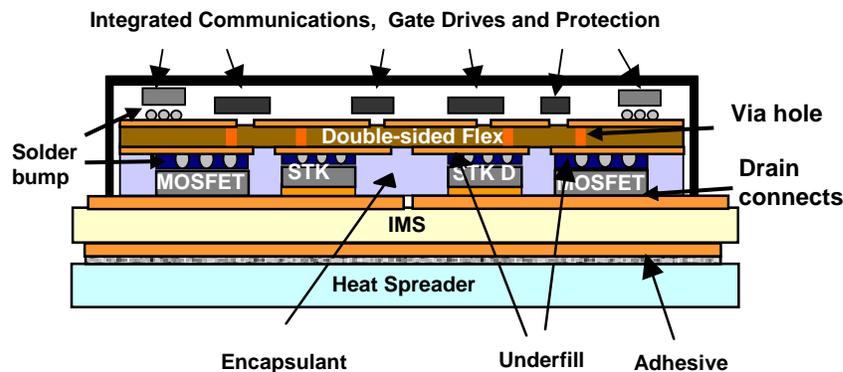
Schematic structure of an FCOF-IPEM built using solder-bumped power devices.
